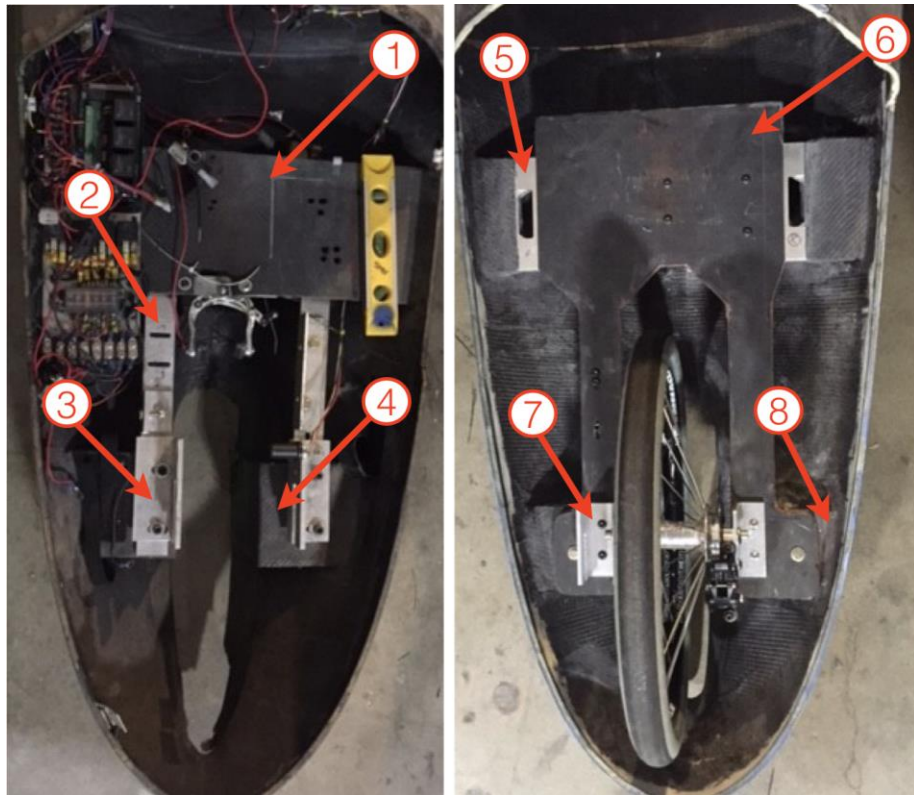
Shown on the left is the 2015 car's rear end made up of multiple pieces. Parts 1 through 4 each have to be individually located and fastened. On the right is the improve 2016/2017 modular engine plate. Here, parts 6 and 7 are immediately located by part 6, the bracket. everything is then fully fastened to the chassis by part 8.
